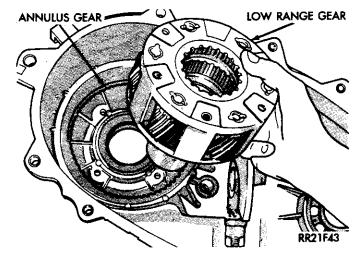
Removing/Installing Low Range Gear And Input Shaft
